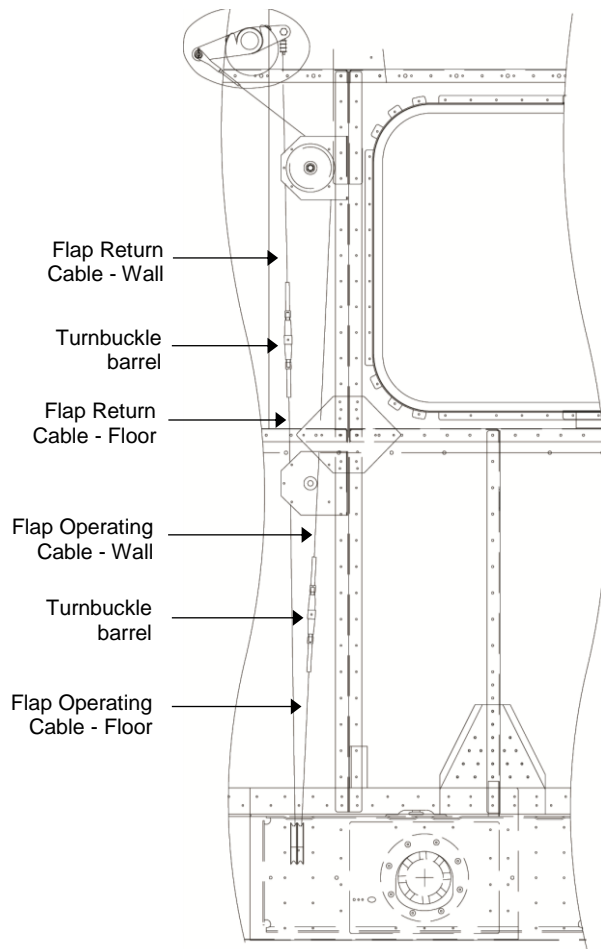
Flap Cable routing in LH Sidewall, RH similar
